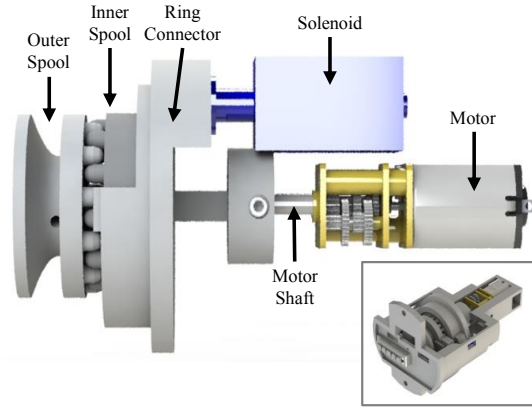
The actuation mechanism consists of a spool in two parts driven by a DC motor. The inner spool is mounted to a ring connector and attached to a solenoid, which engages or disengages the teeth on the spool. The inset on the bottom right shows the fully assembled mechanism in its housing.
